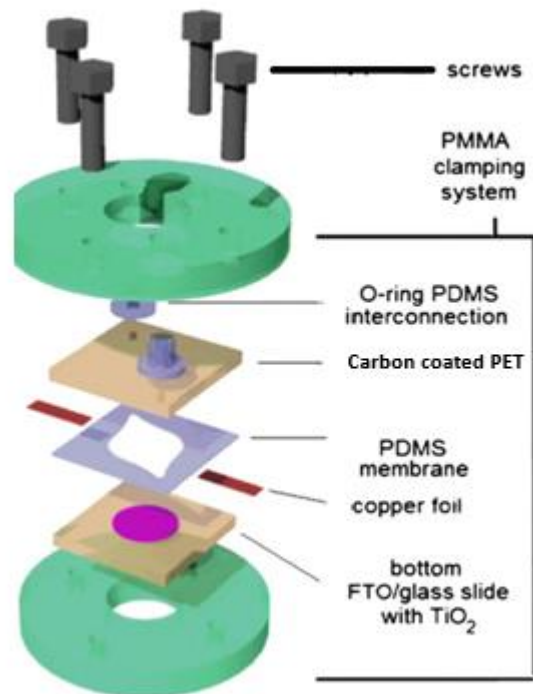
Complete assembly of DSSC using microfluidic technique [15]
